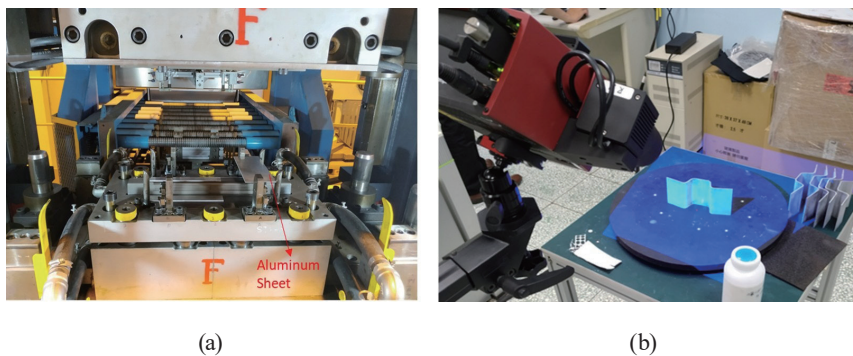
(Color online) (a) Experimental setup for the warm/hot forming of hat-shaped parts and (b) ATOS 3D scanner for profile measurement.
